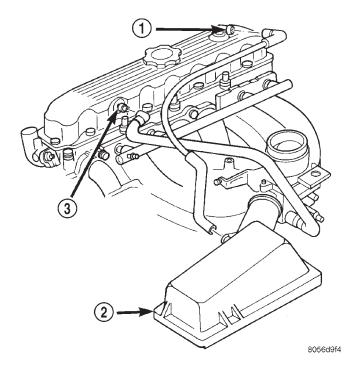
Crankcase Ventilation (CCV) Hose—2.5L Engine
